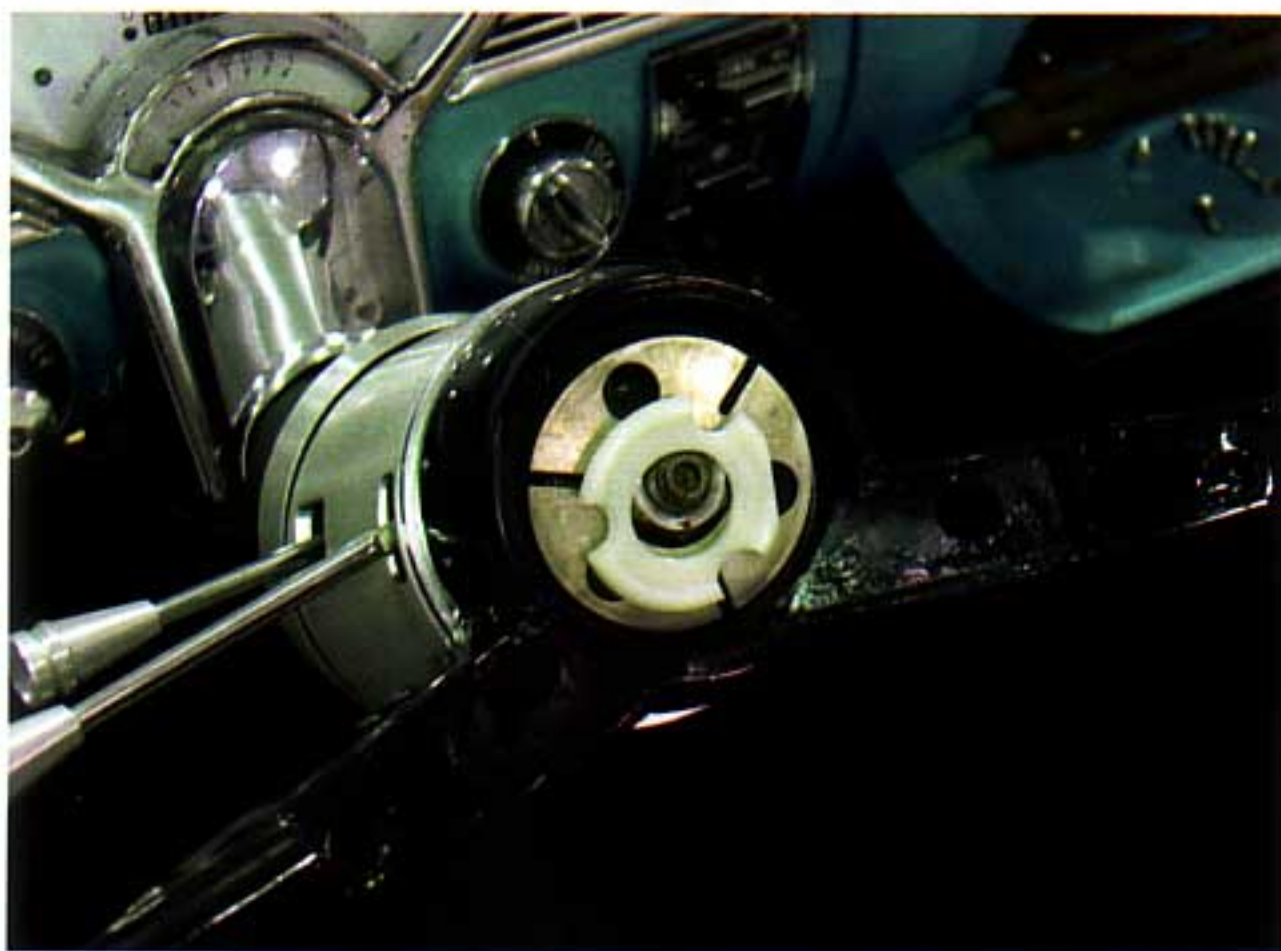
Now install the Belleville spring and the nylon ring. These parts will fit under the horn ring. Make sure the arch of the Belleville spring is facing upward.
